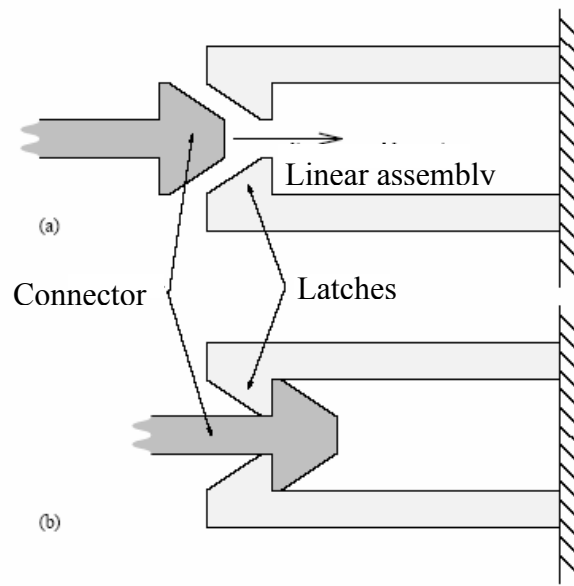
Snap fasteners for microassembly. Figure courtesy of [15]
